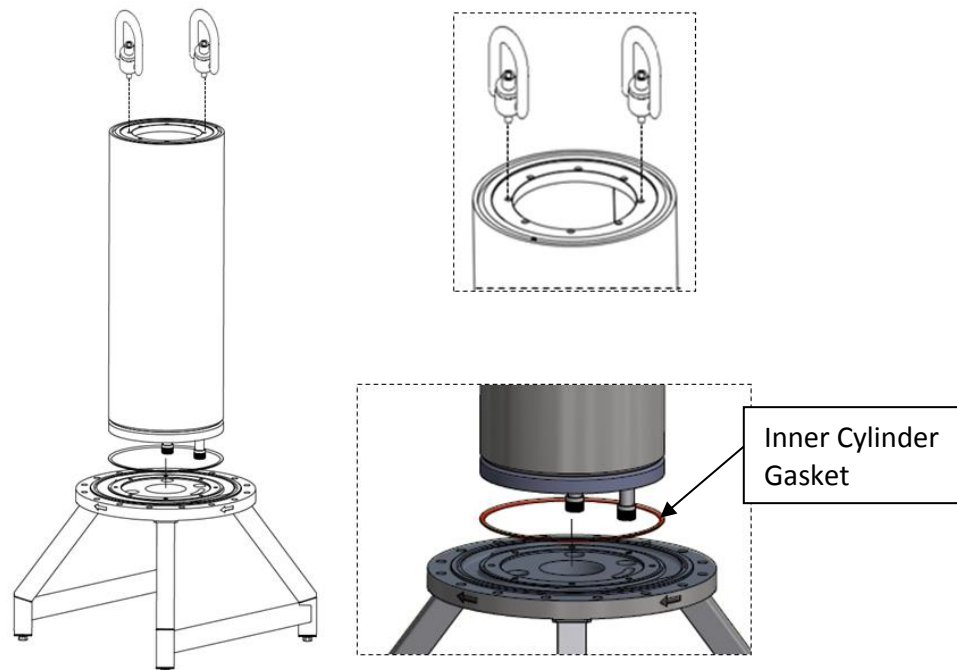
Dismantling the heat exchange inner cylinder
